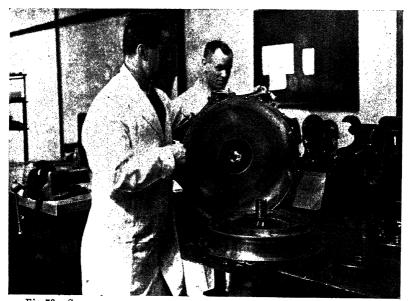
Showing volute casing ready for assembly to blower casing.
